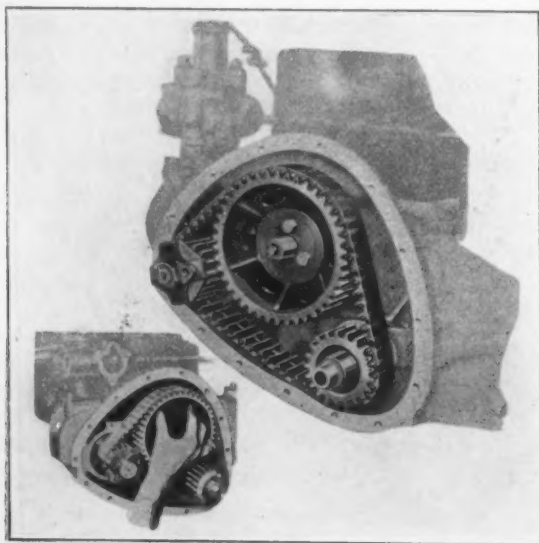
ASSEMBLY WITH MANUAL ADJUSTMENT
